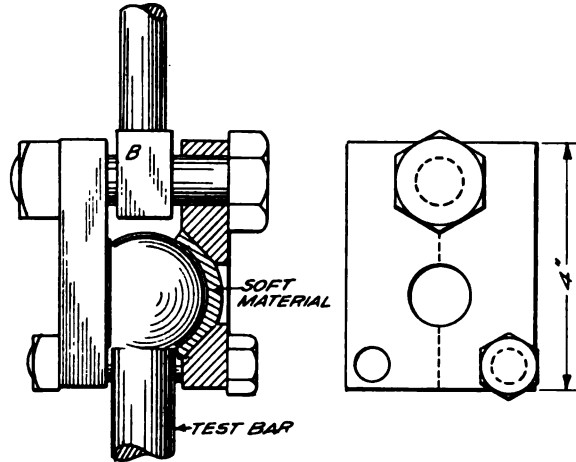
GRIP USED IN TENSION TESTS OF ROUND RODS
